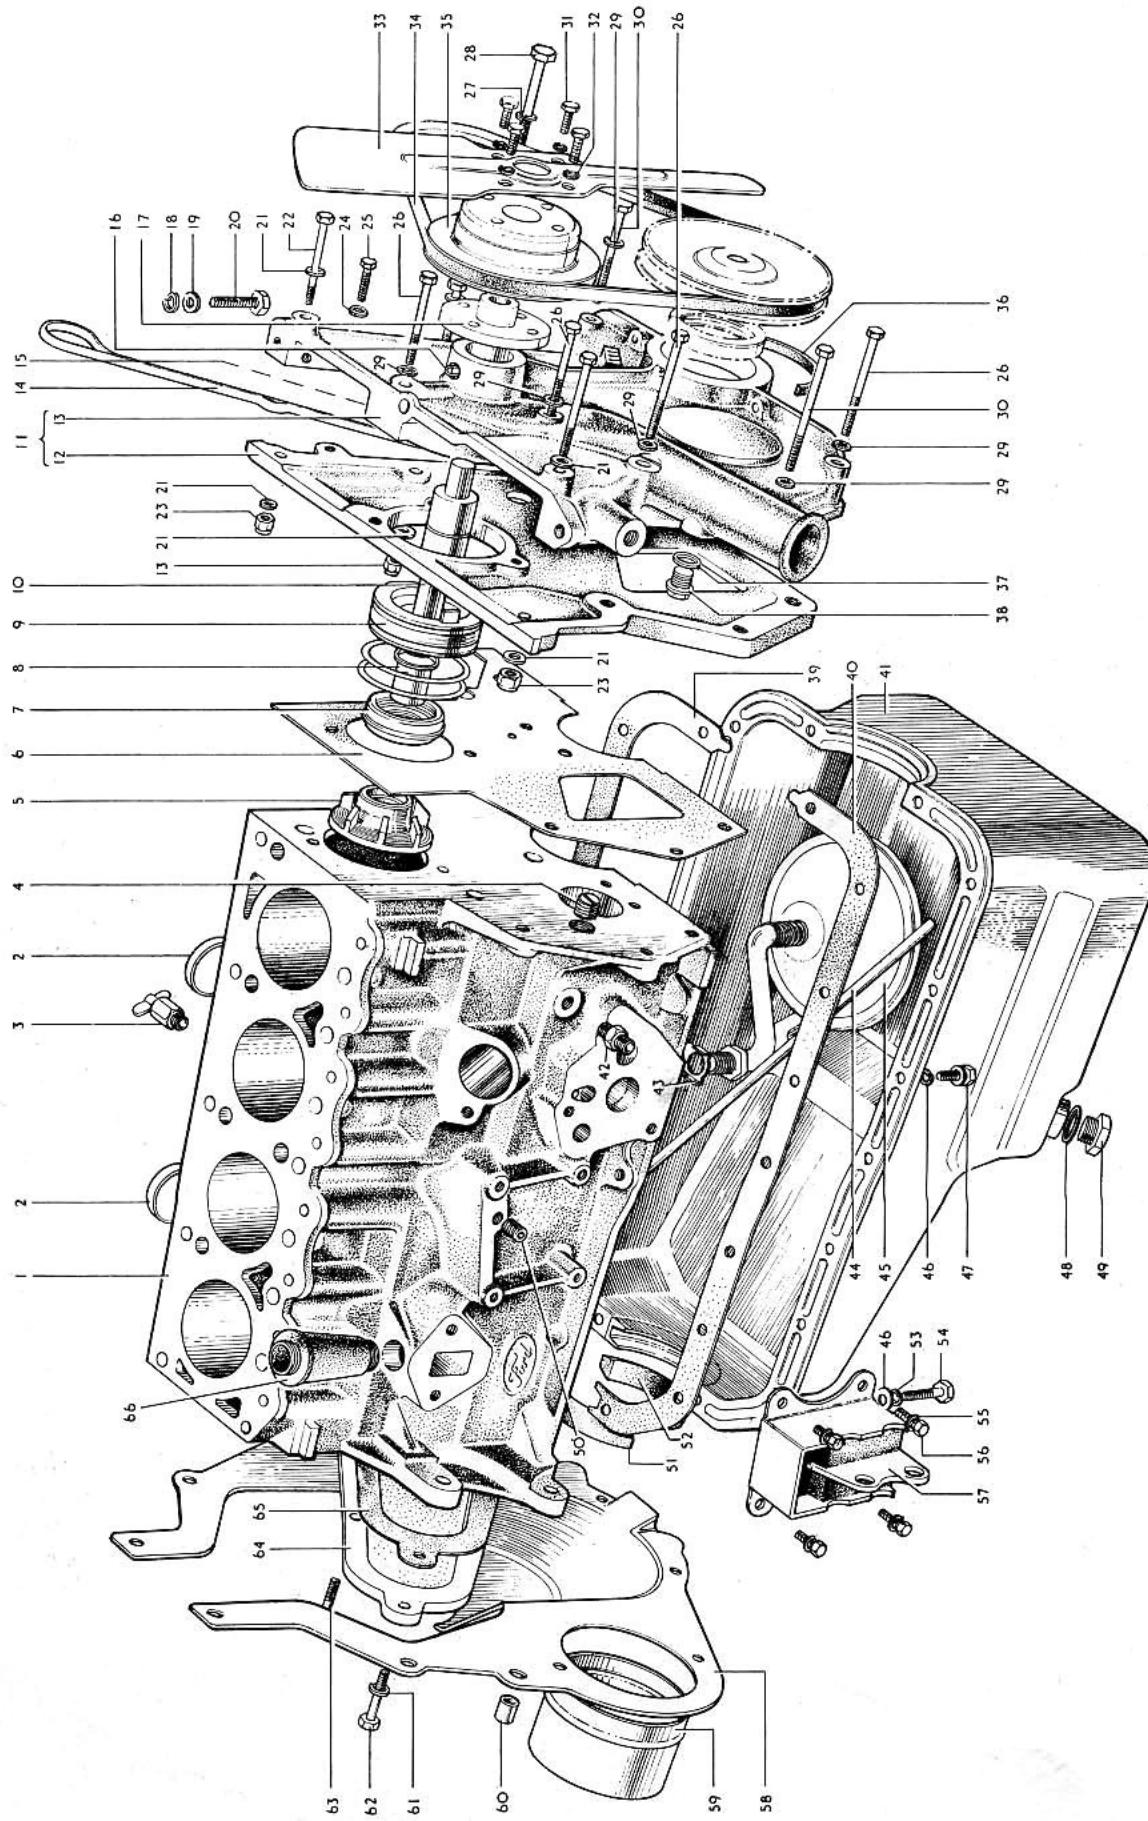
CYLINDER BLOCK AND WATER PUMP COMPONENTS
